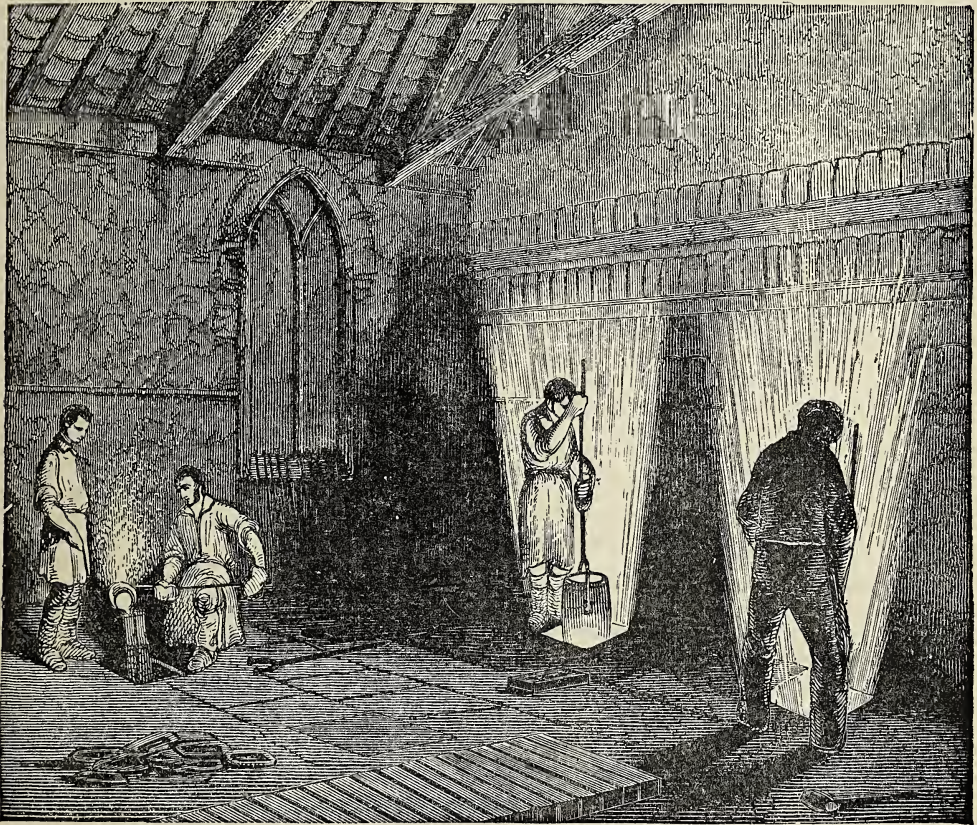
Steel-casting : Furnaces, Crucibles, Moulds, Ingots, &c.
